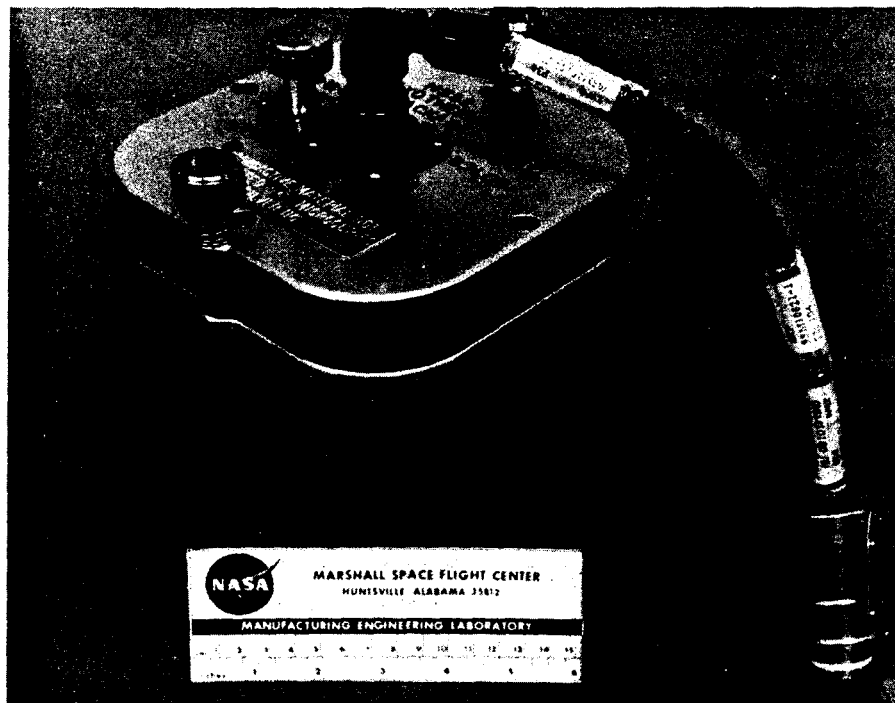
M552 EXOTHERMIC PACKAGE AND ELECTRICAL POWER CABLE
